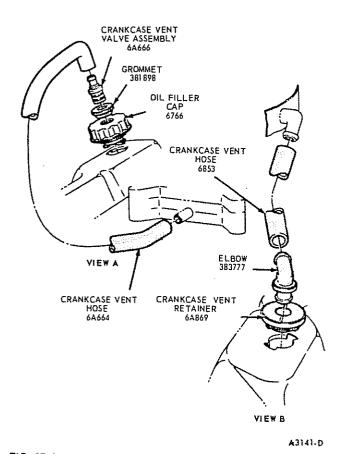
Crankcase Ventilation System Regulator Valve Installed
